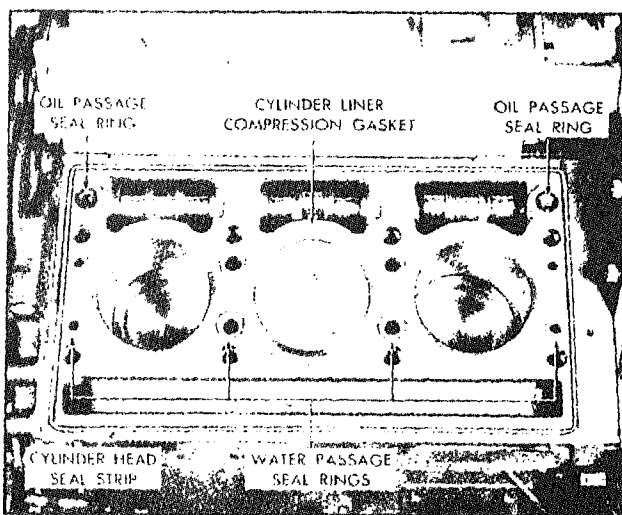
Cylinder Head Gaskets and Seals in Place on Cylinder Block
